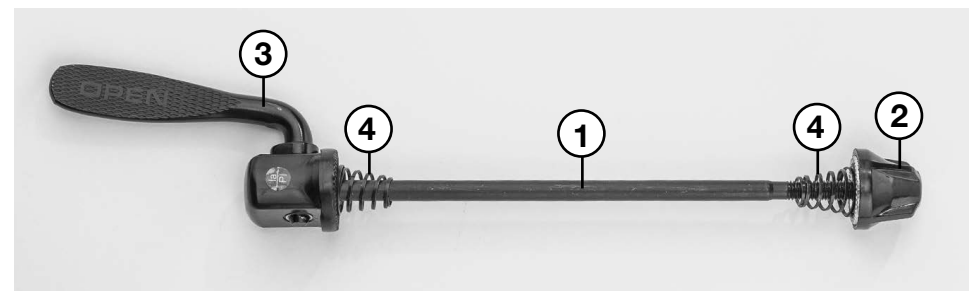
Quick release wheel axle : 1. Shaft 2. Nut 3. Lever 4. Conical spring.
